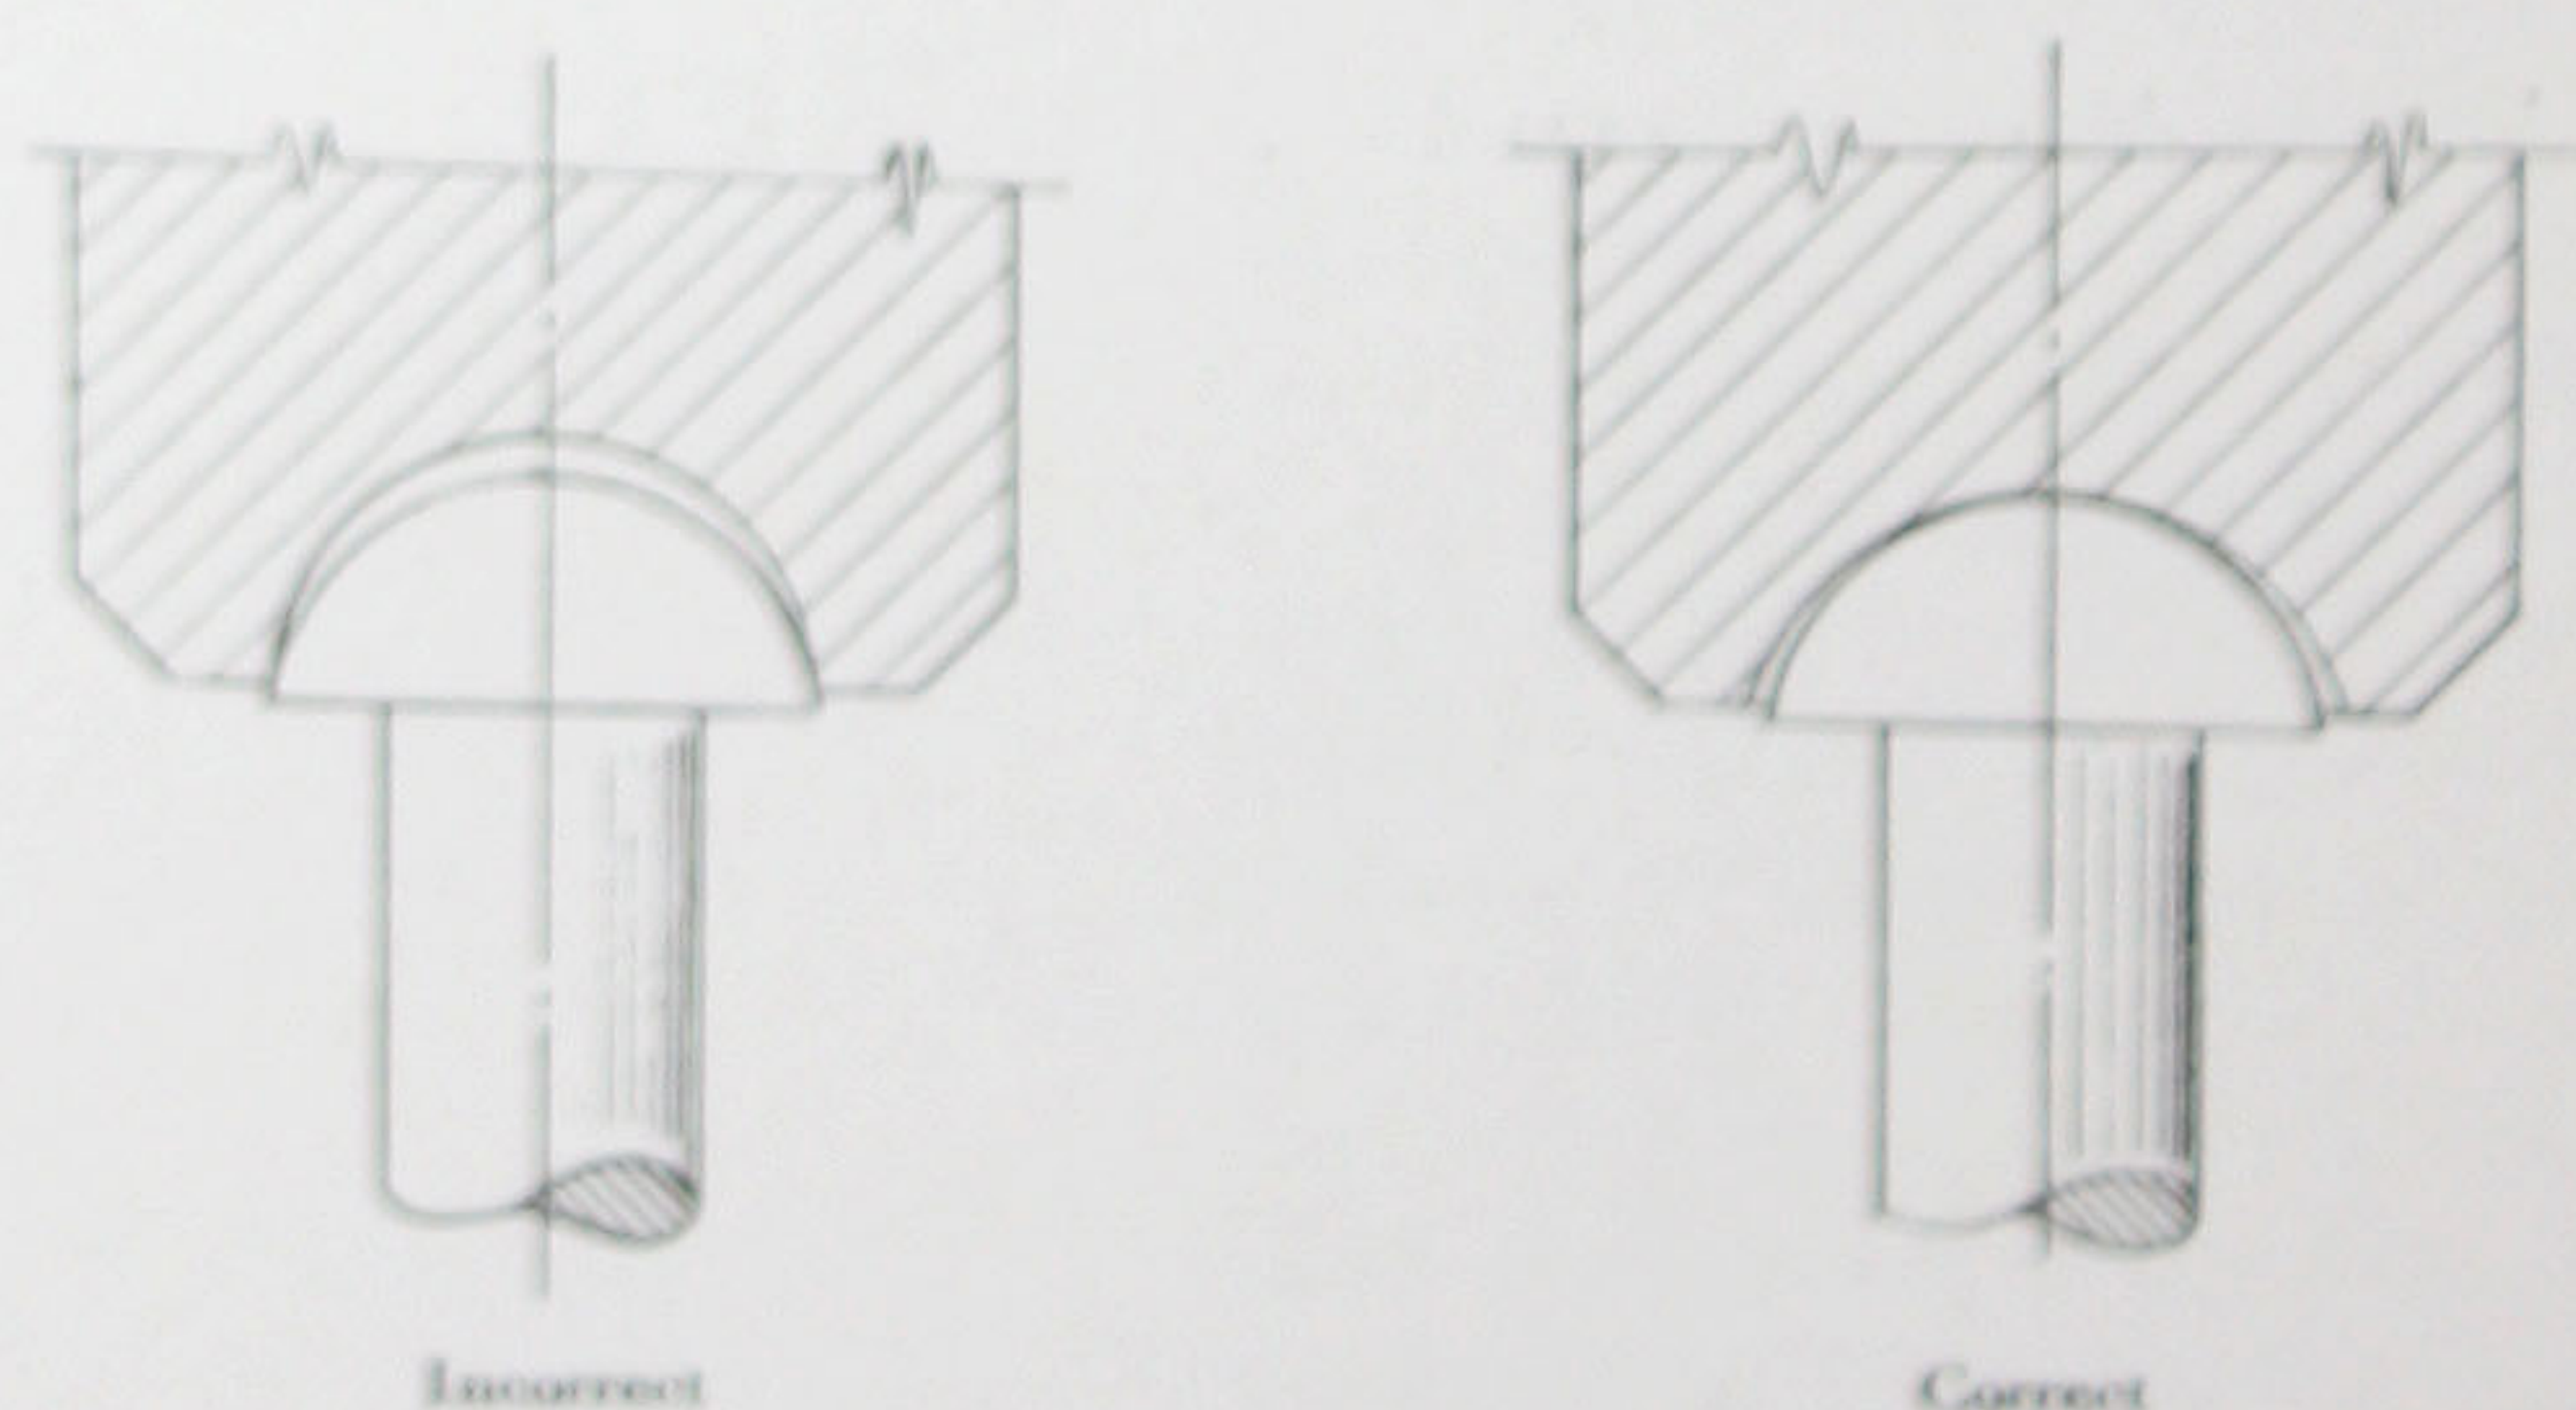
Sketch showing the incorrect and correct fit of the backing tool on the manufactured head.
